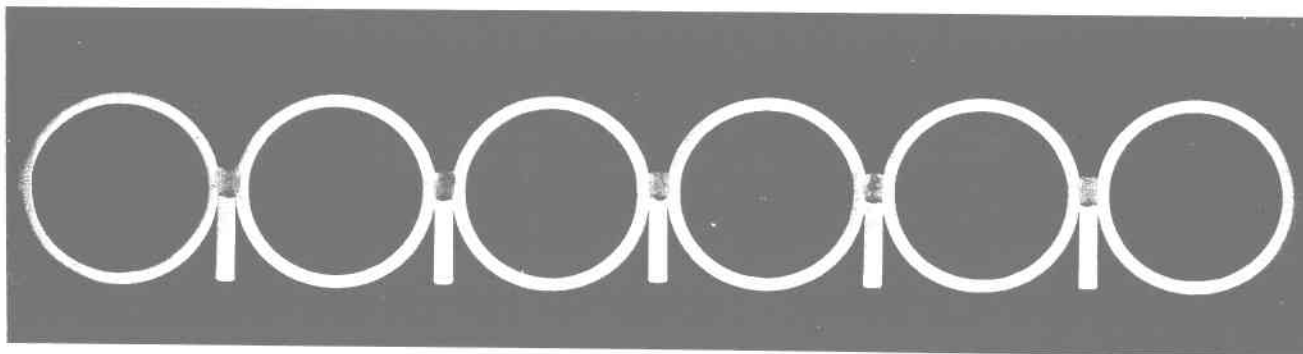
Cross Section of Welded Panel Tubes
